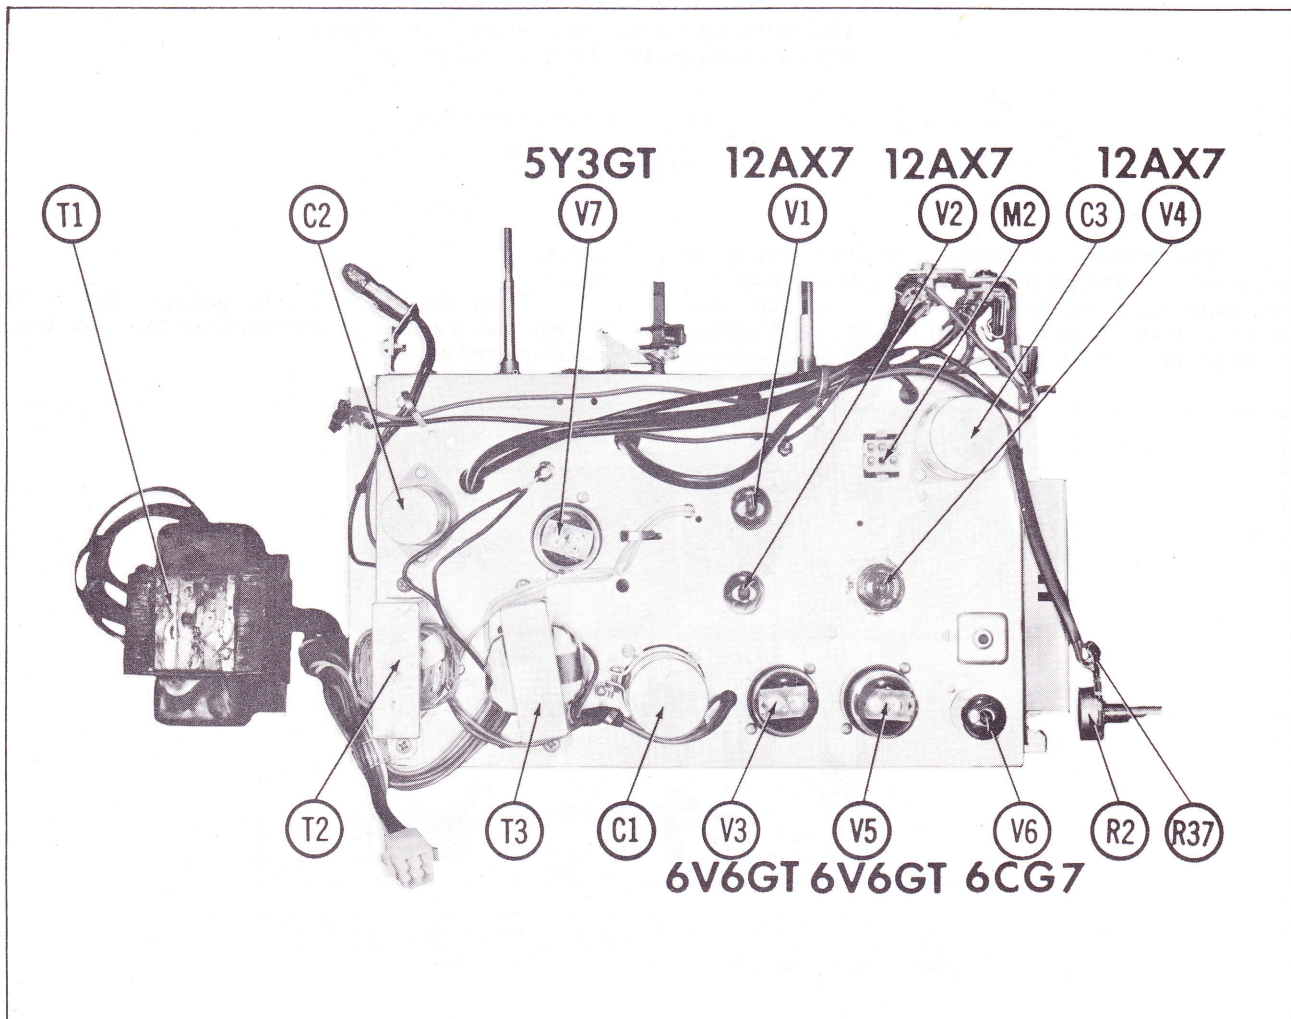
AMPLIFIER CHASSIS — TOP VIEW.
